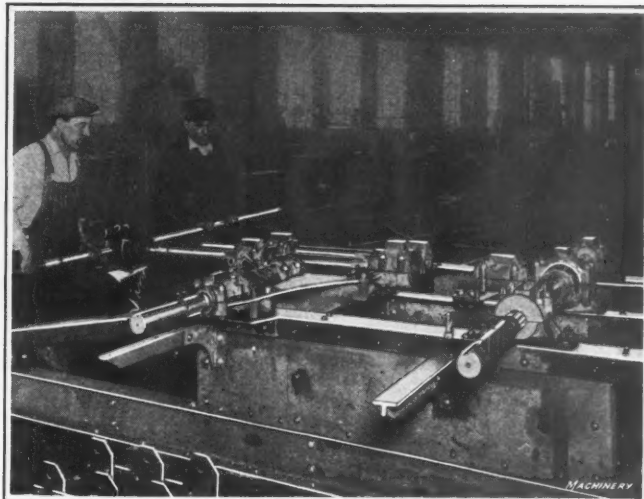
Power Reamer for reaming Bearings on 75-horsepower Tractor
